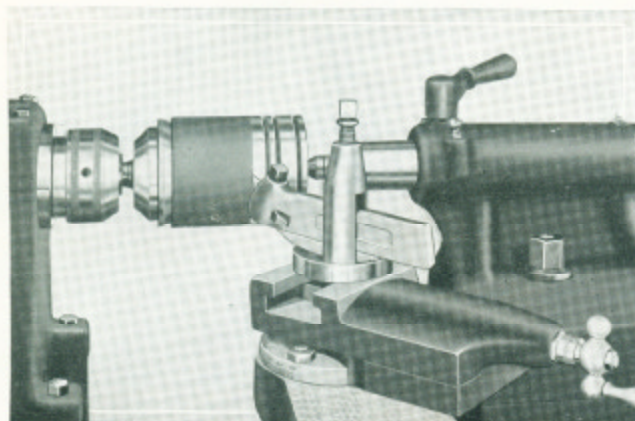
Finishing a semi-machined piston on the Brake Drum Lathe
